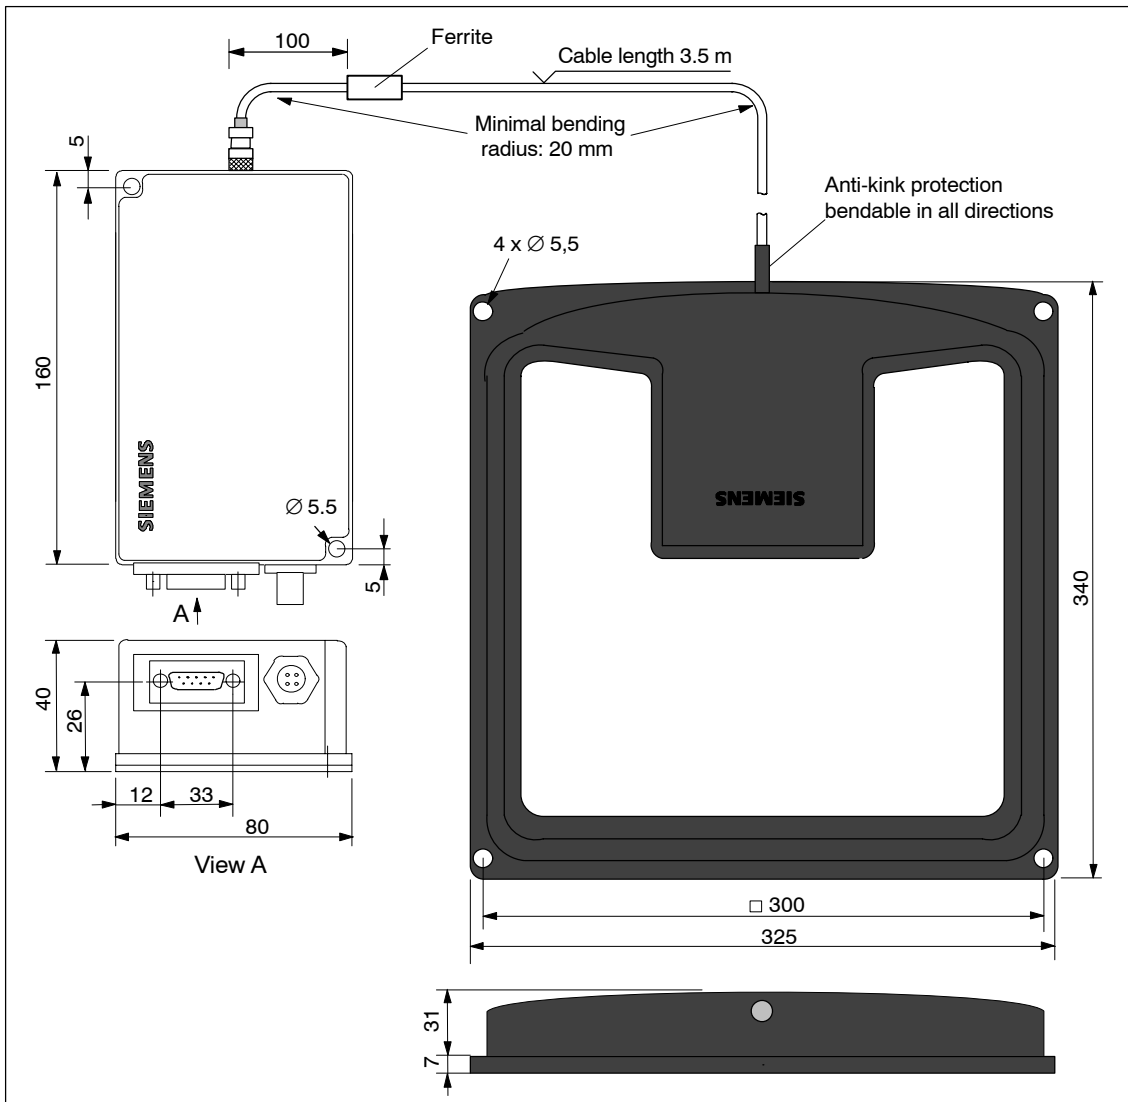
Dimensioned drawing of the SLG D11 ANT D5
